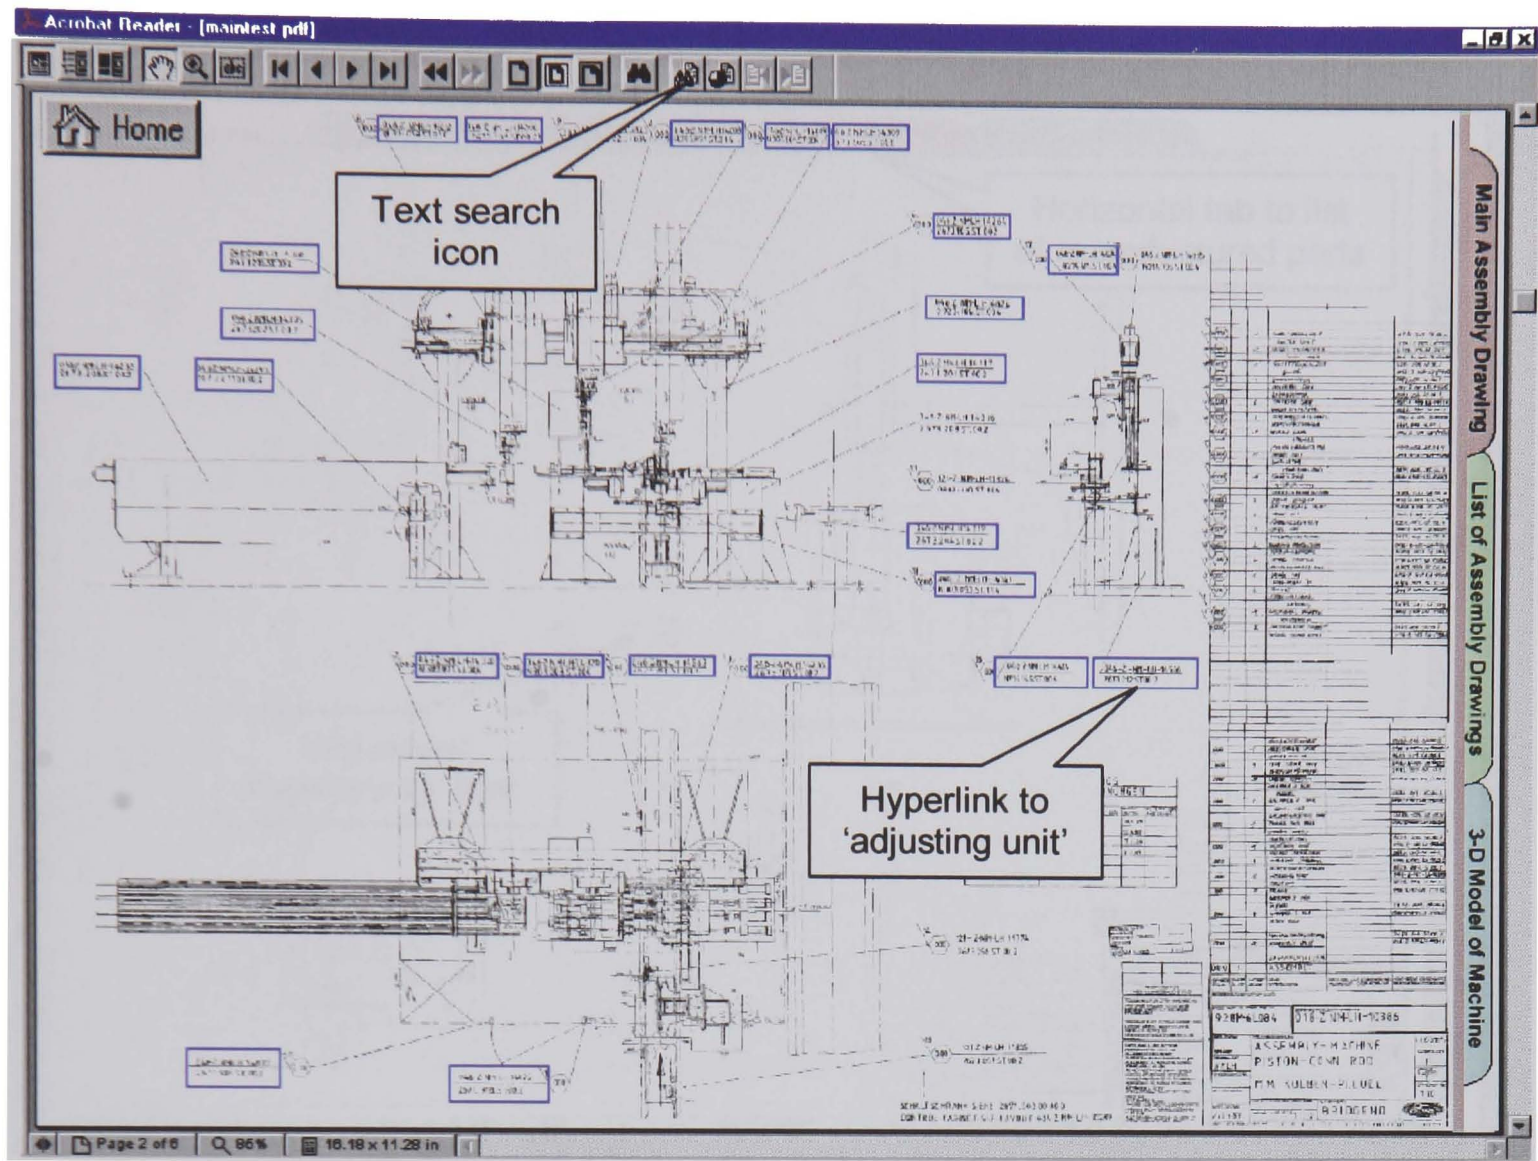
Assembly drawing with text search icon and links to sub-assemblies
